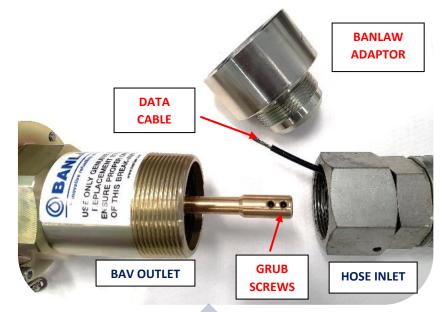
Parts Connecting FuelTrack BAV Outlet into Dispensing Hose
